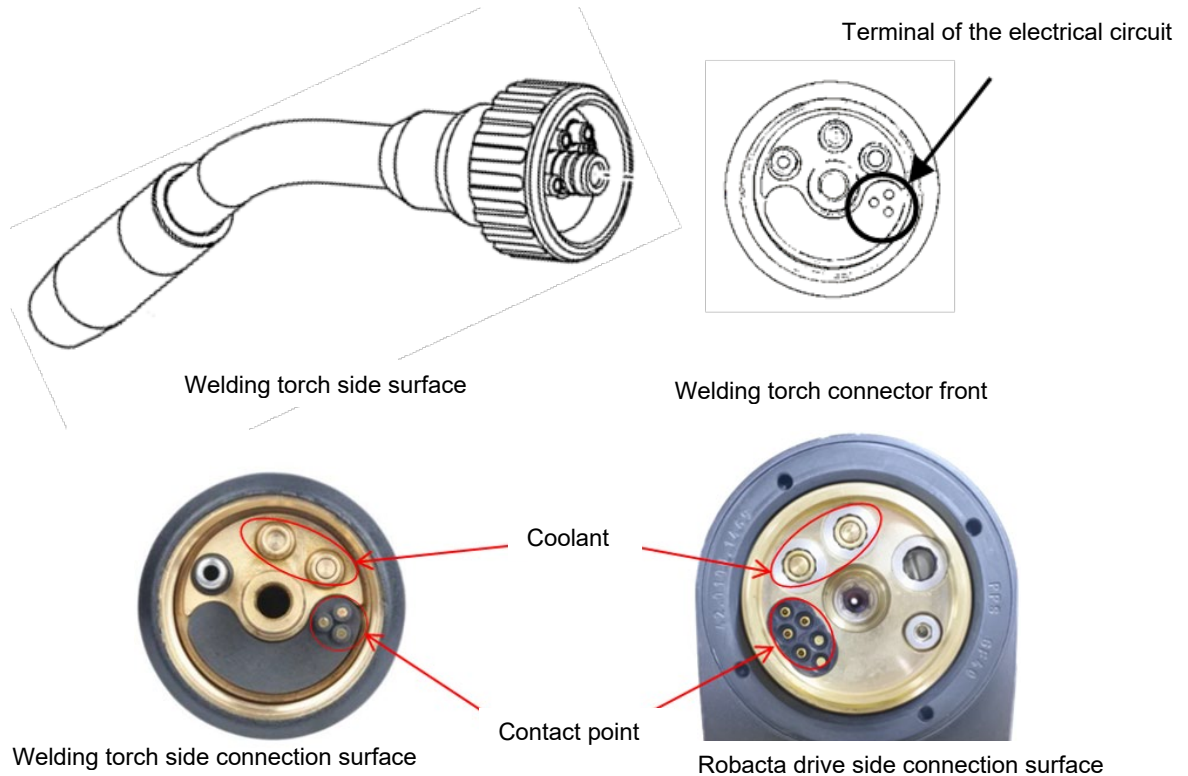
(a) Connection part of the welding torch
